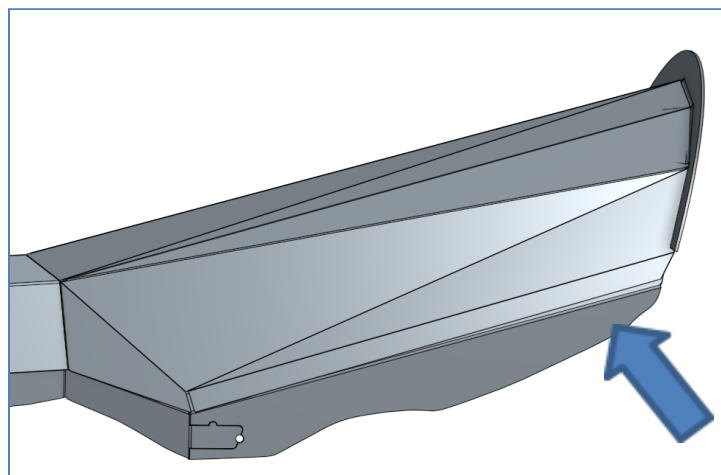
Notch to locate perimeter frame to firewall / floor seam.
